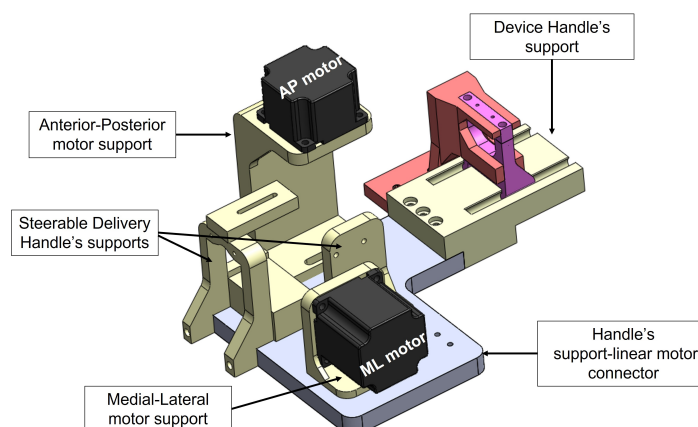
Delivery Handle's complete support comprising: Device Handle support previously described; ML and AP motor's support; Steerable Delivery Handle supports; a base (grey) to connect every component to linear motor actuator.
